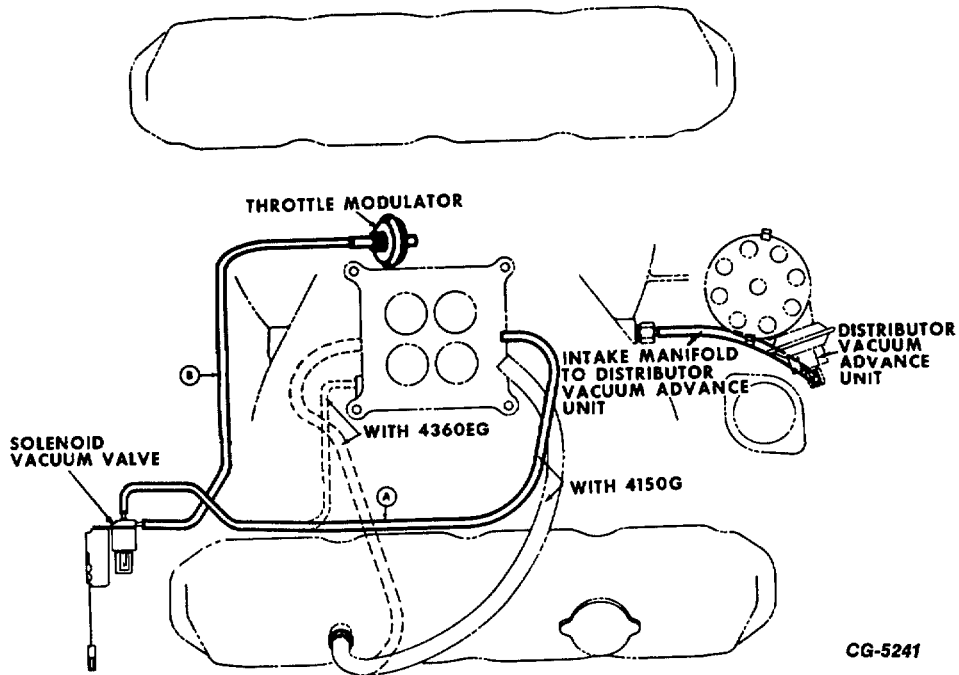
Vacuum Hose Locations on MV-404;446 Engines With 4150G Carburetor in Cargostar and S-Series Vehicles (Sold in Canada)
